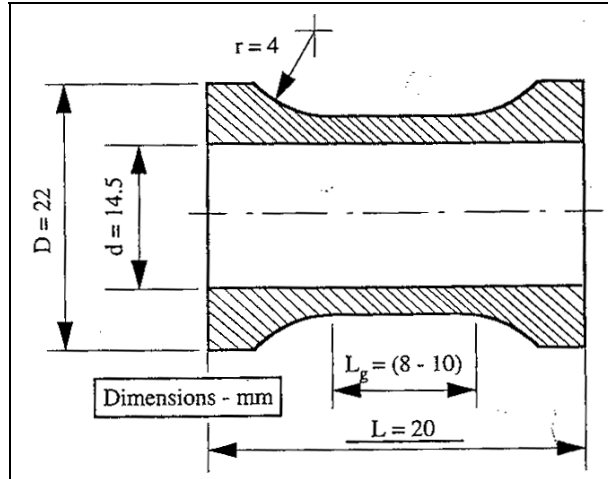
Dog bone-shaped hollow cylindrical specimen geometry for torsional testing.
